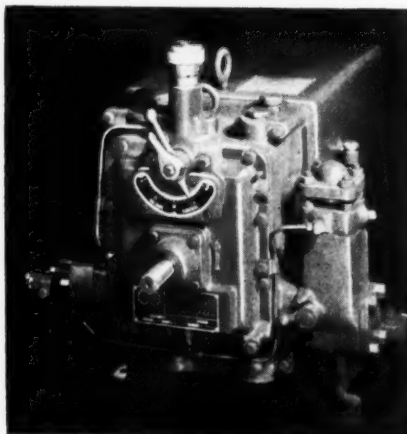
Basic Oilgear Unit Provided with Both Fine-feed and Hydraulic Delayed Reverse Attachments
